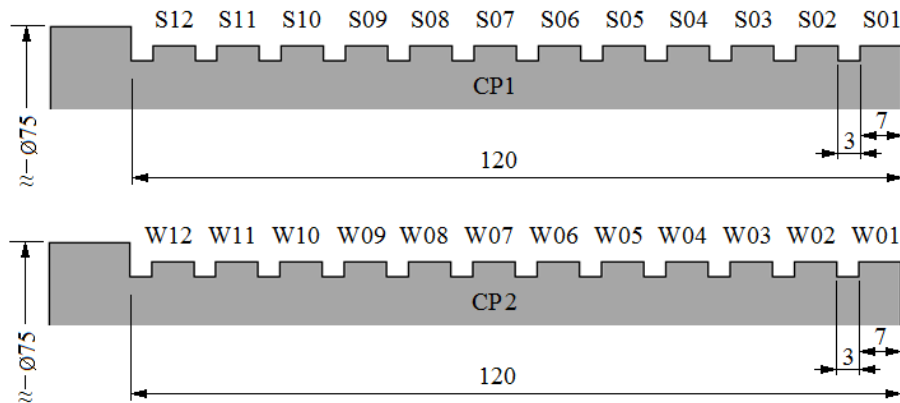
Schematic drawing of the samples (regions) machined in each workpiece.
